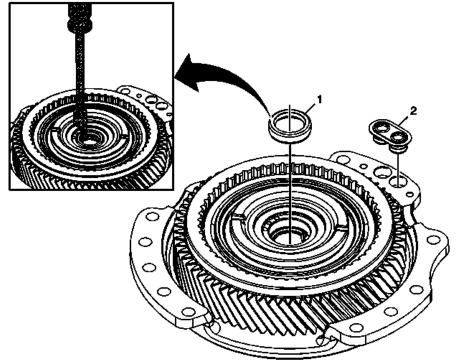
Identifying Torque Converter Fluid Seal Courtesy of GENERAL MOTORS COMPANY
